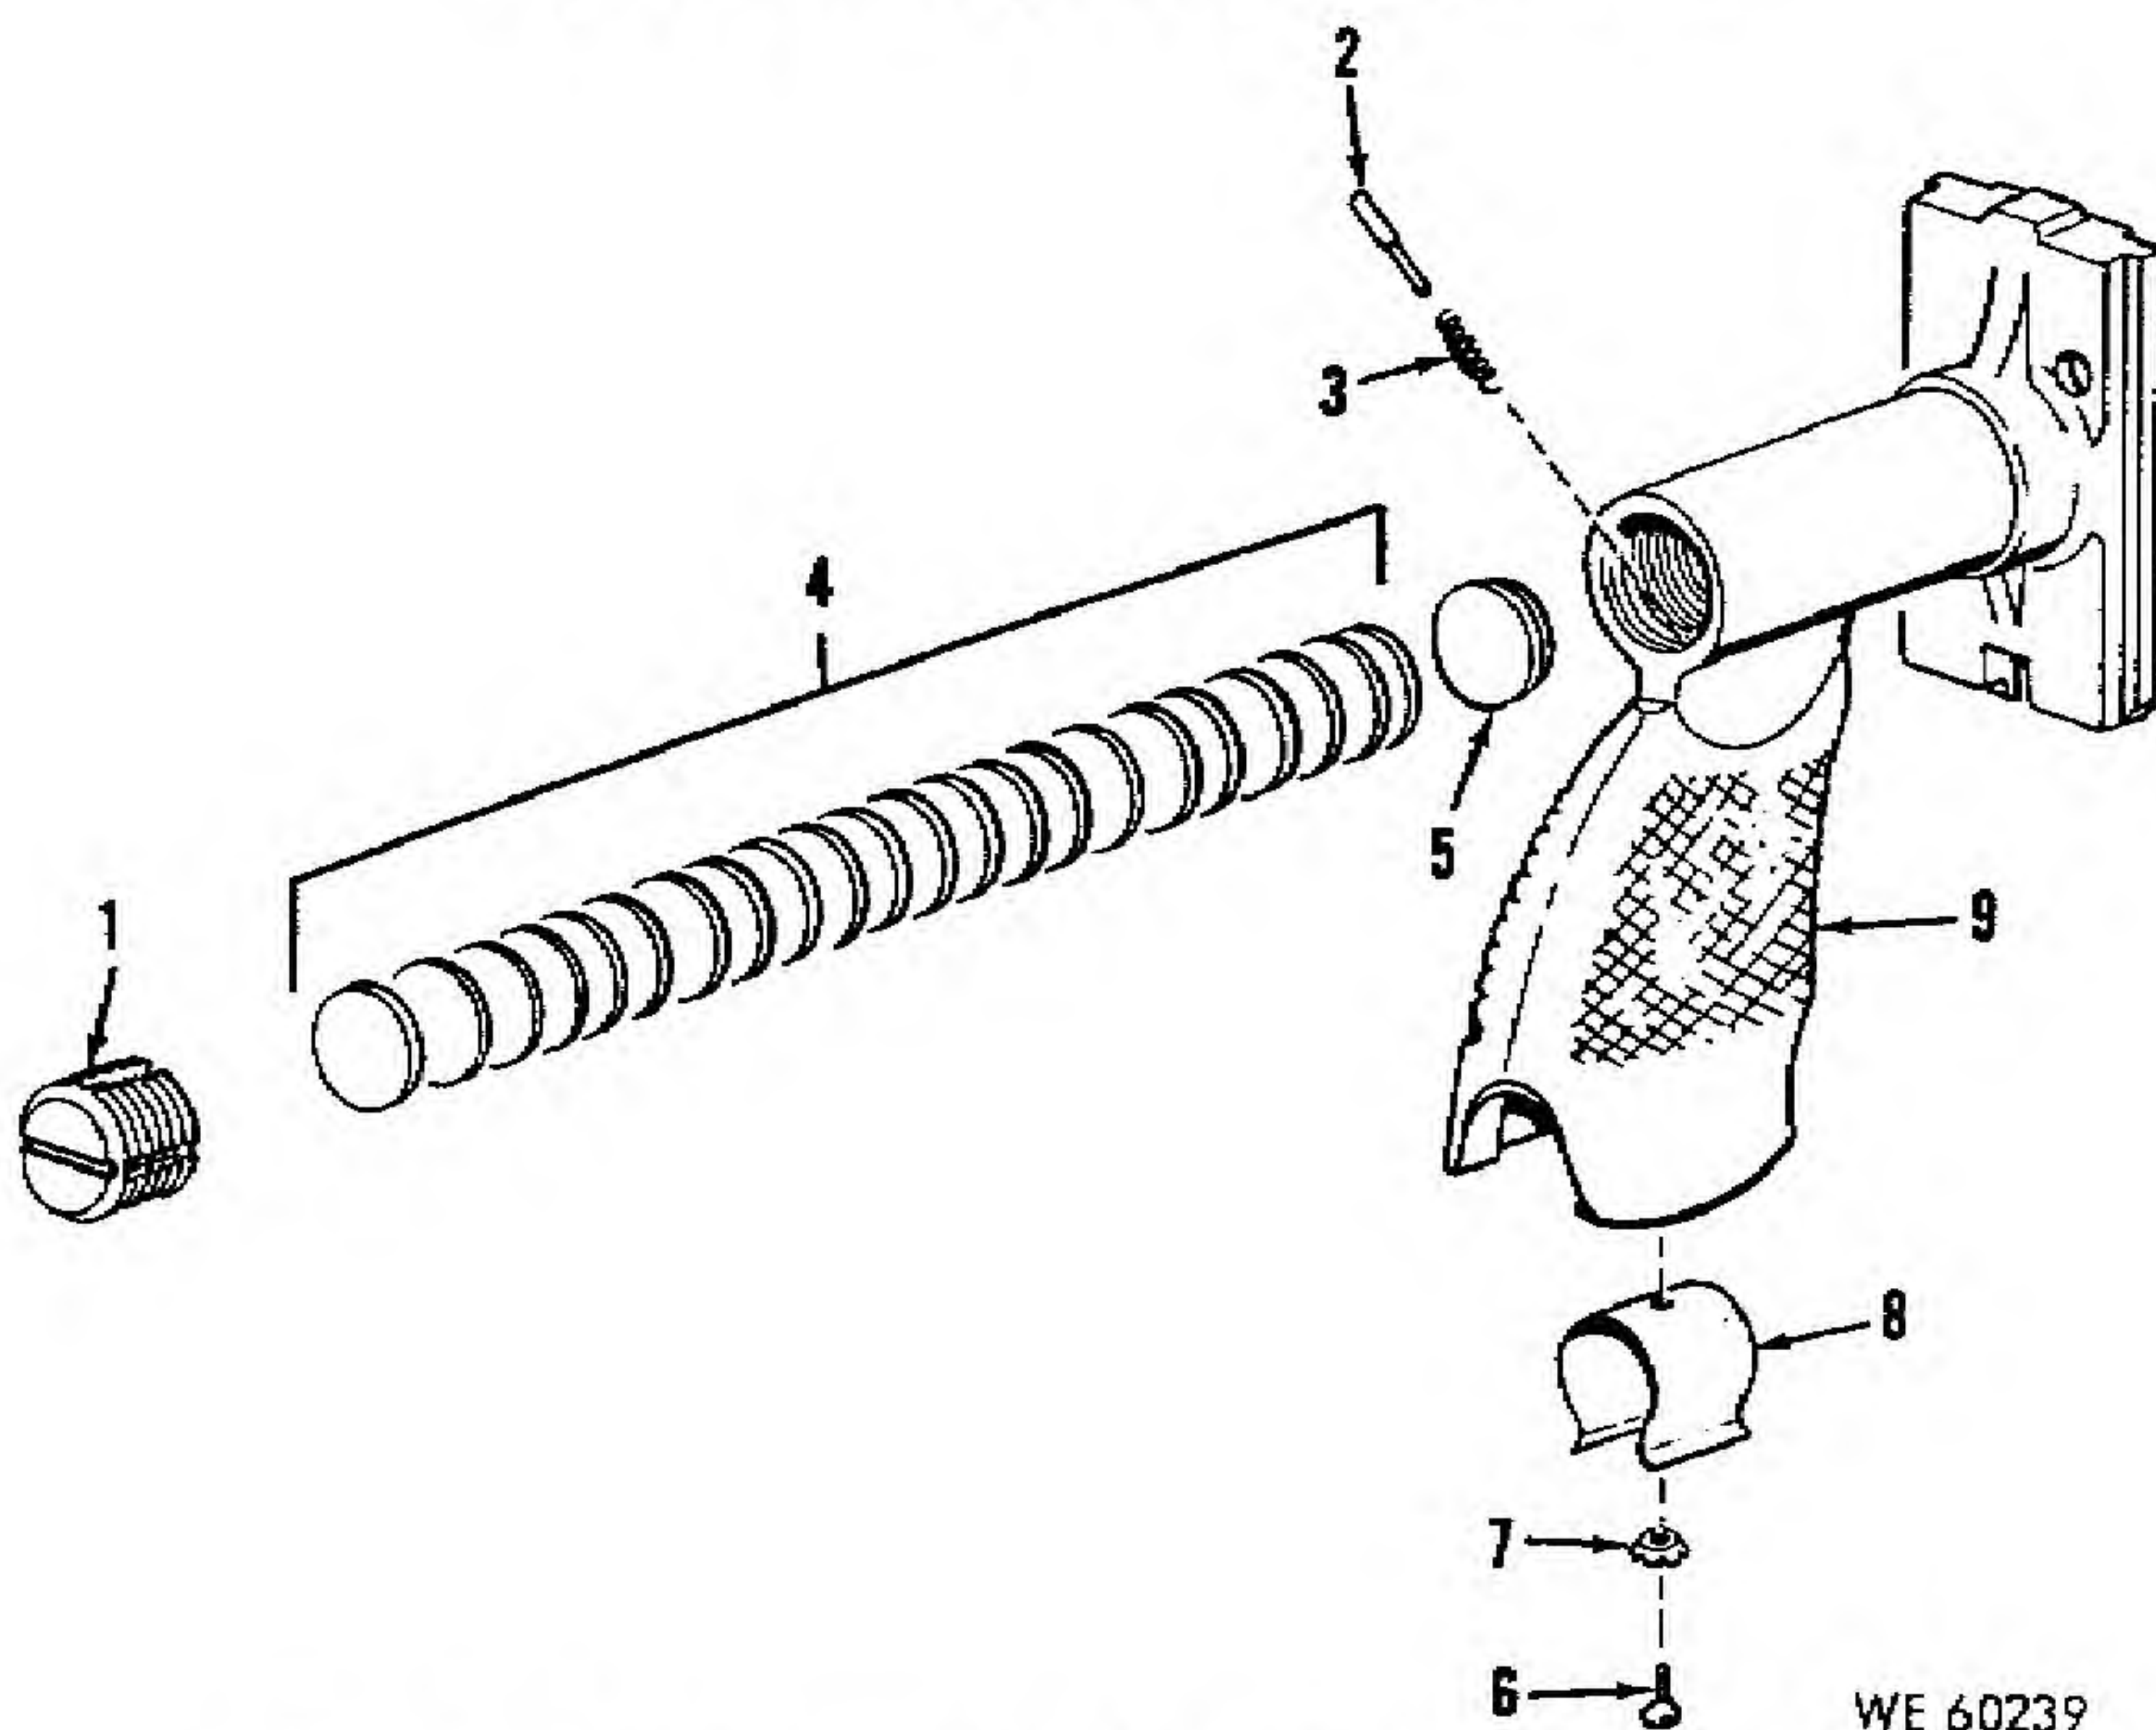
Caliber .30 Machine Gun, M37—major groups and assemblies—partial exploded view.
